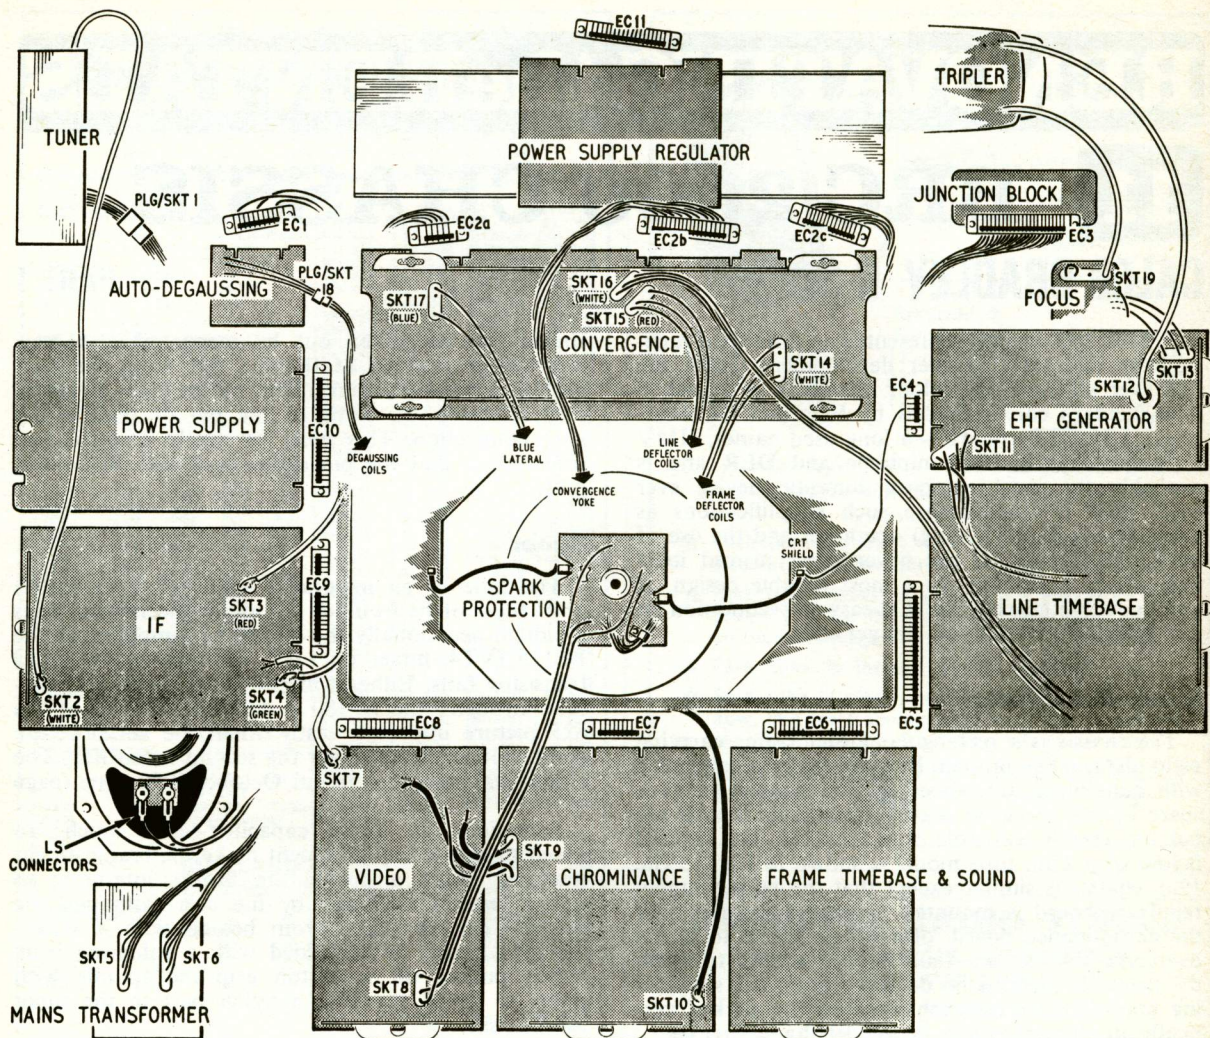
Arrangement of the eight detachable printed boards. In 19in. models the power supply regulator board is mounted above the chrominance board on two brackets.
